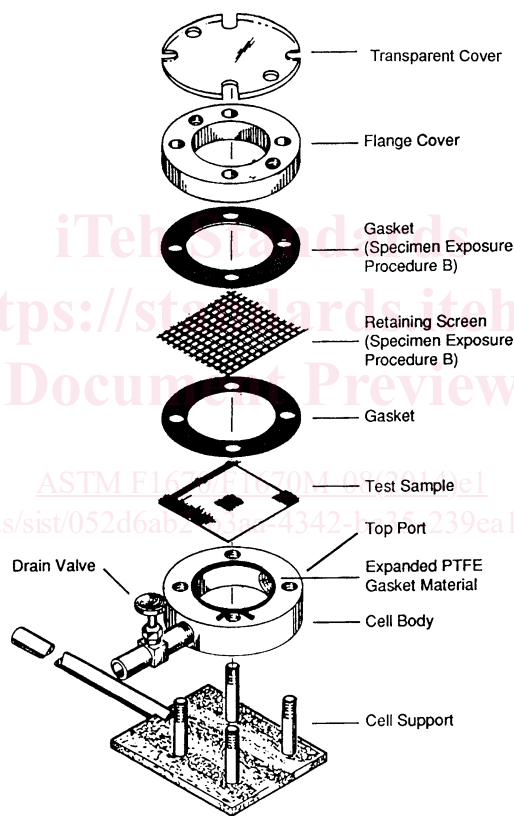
Exploded View of the Penetration Test Cell with Retaining Screen
